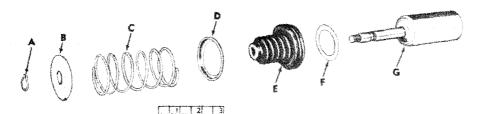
ASSEMBLING EXTERNAL PARTS OF DRIVE CLUTCH ASSEMBLY.
